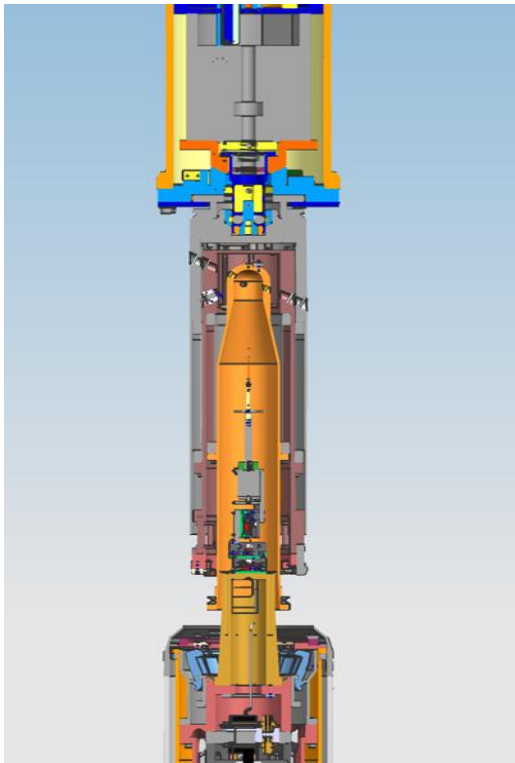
Linear induction motor (LIM) gripped onto shroud.
